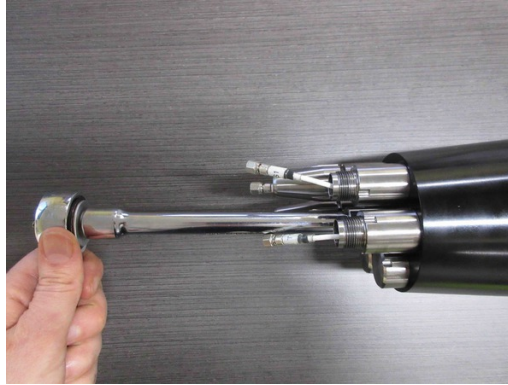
Loosening the front sealing nut with a socket wrench (with extension).
